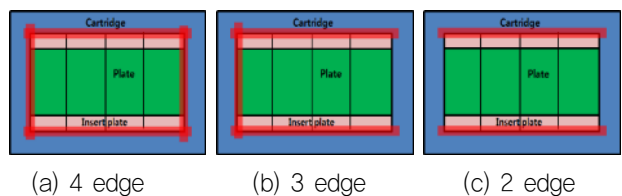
Schematic diagram of bulkhead according to welding edge along bulkhead and inserted plate
